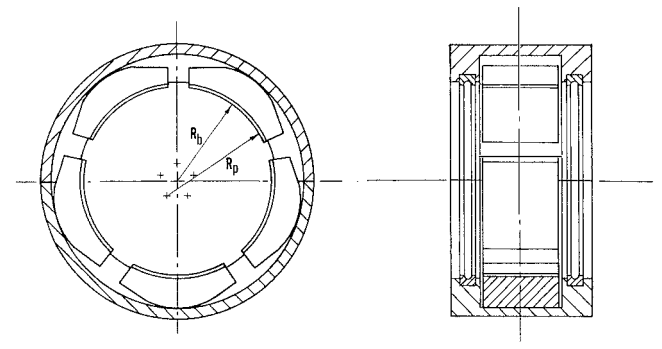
Rocker Pivot Tilting-Pad Journal Bearing.
